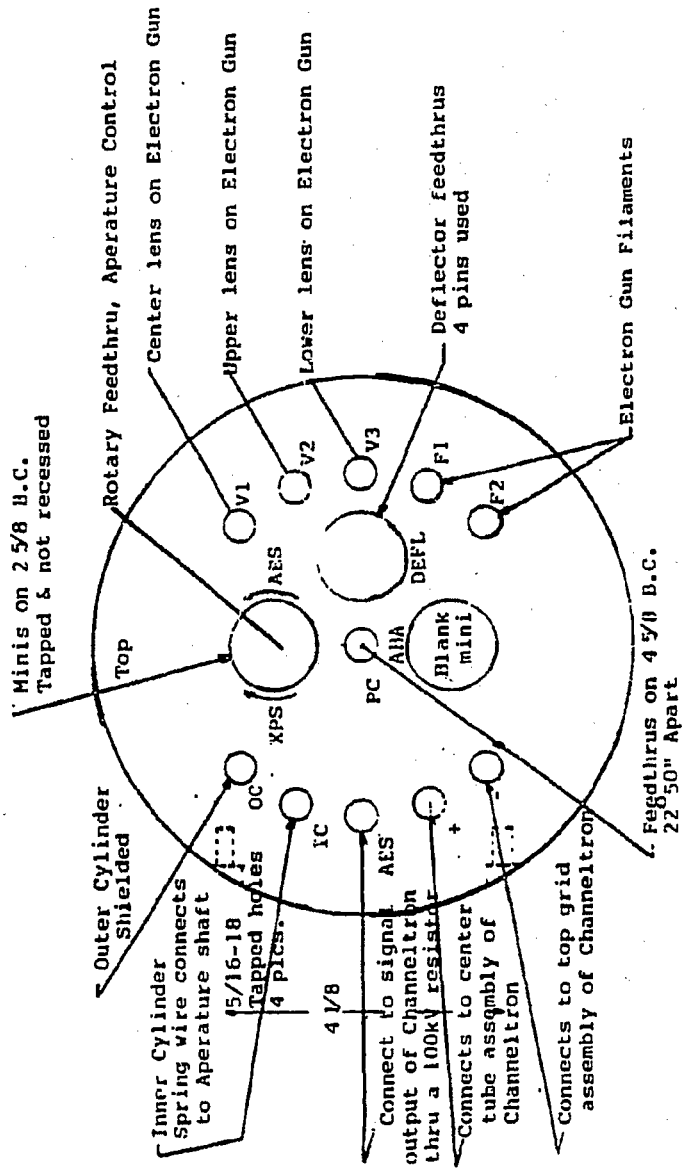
8-in. conflat flange for mounting the CMA to the vacuum chamber has a 10 pin feedthrough mounted on a mini flange, a rotary feedthrough to move the pivoting aperatures (see Fig. A.13 - A.18), and 11 high voltage feedthroughs.
